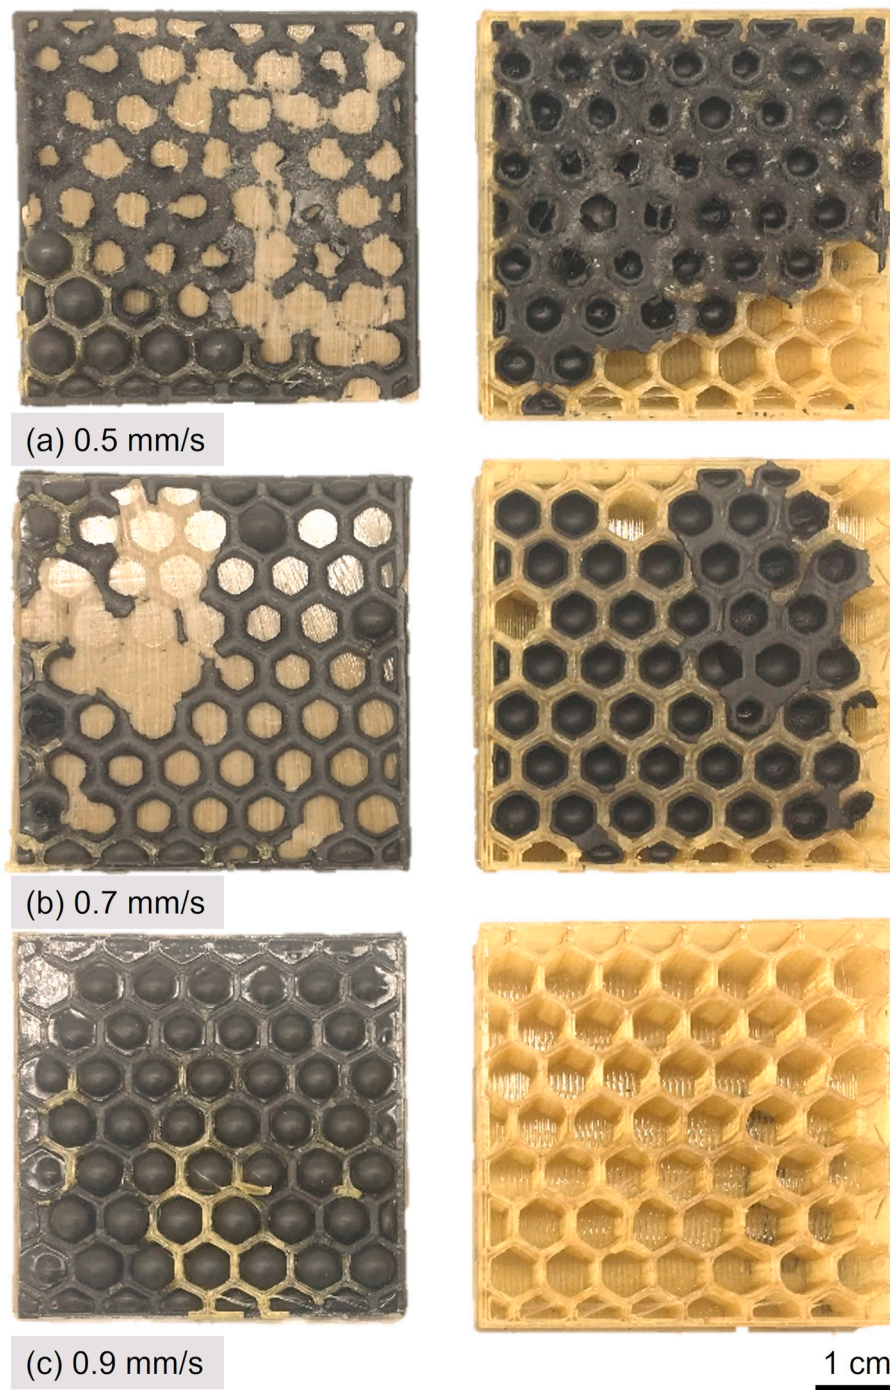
Fractured FWT sandwich samples welded at (a) 0.5 mm/s, (b) 0.7 mm/s, (c) 0.9 mm/s).
